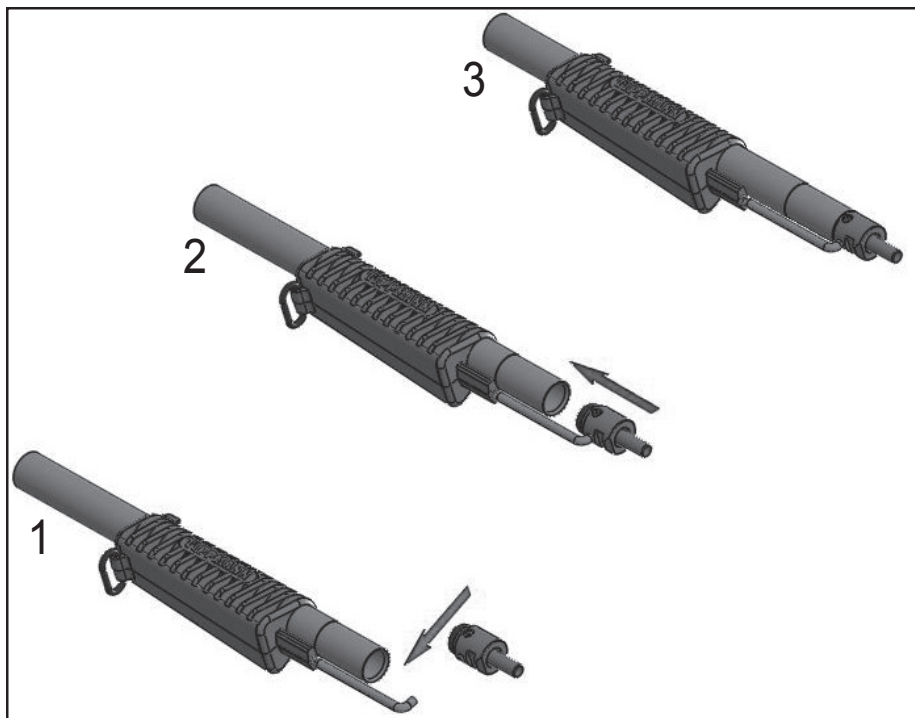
Assemble Bolt to Pump Rod and then into Barrel
